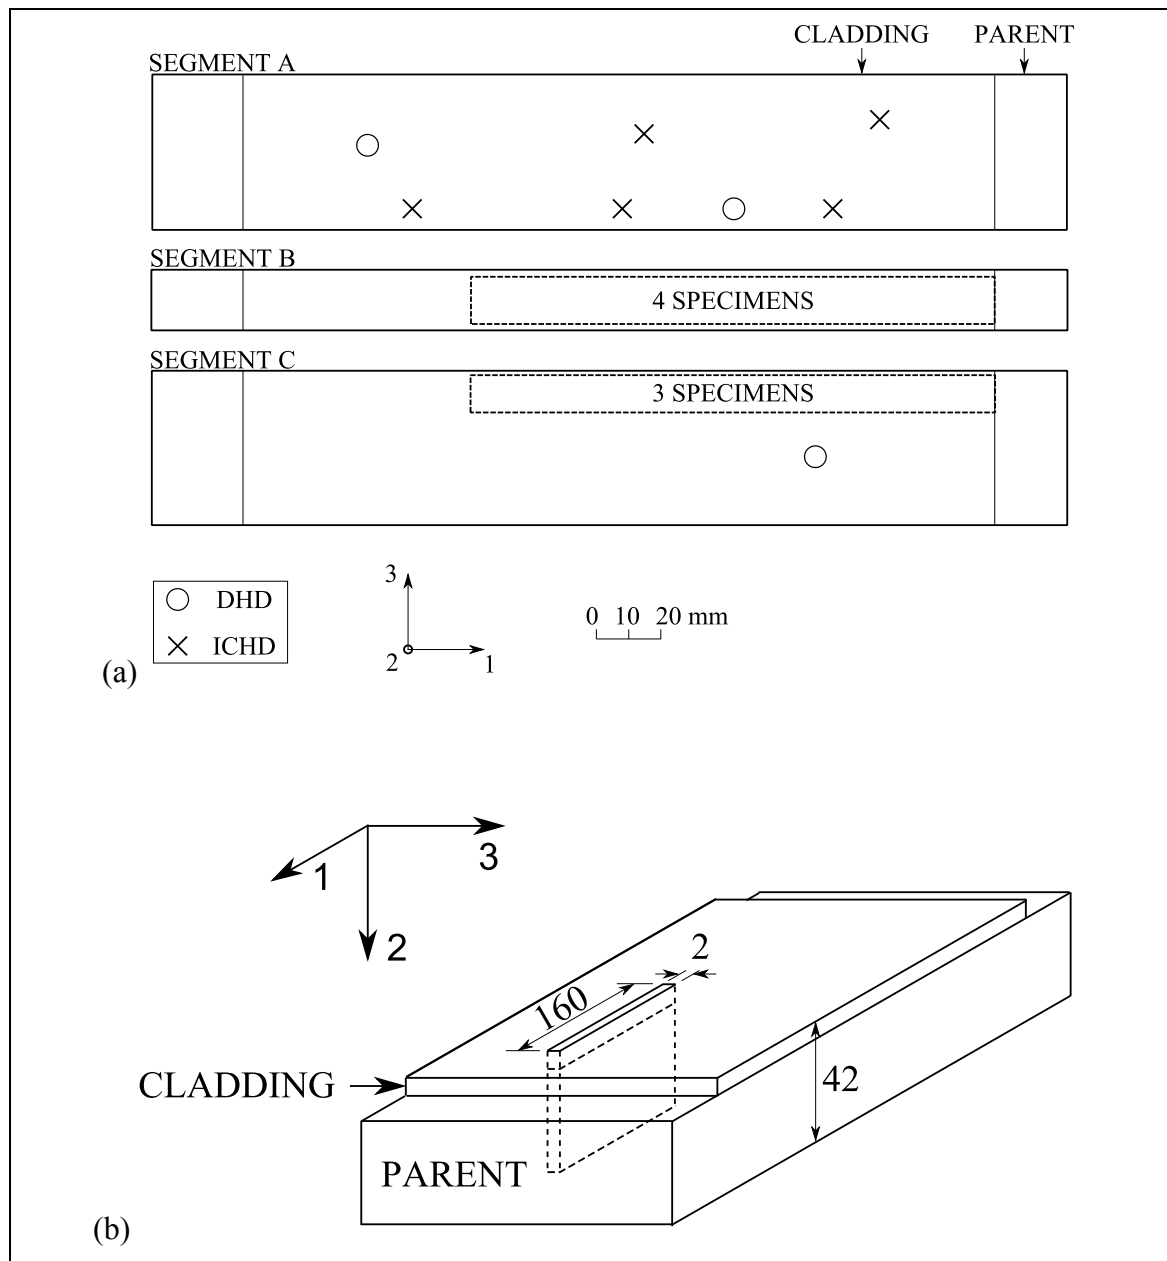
Drawing of the position in the post-weld heat-treated plate from which specimens were extracted (a) and illustration of the orientation of a single specimen in the context of the original clad plate (b). Dimensions are in millimetres.
